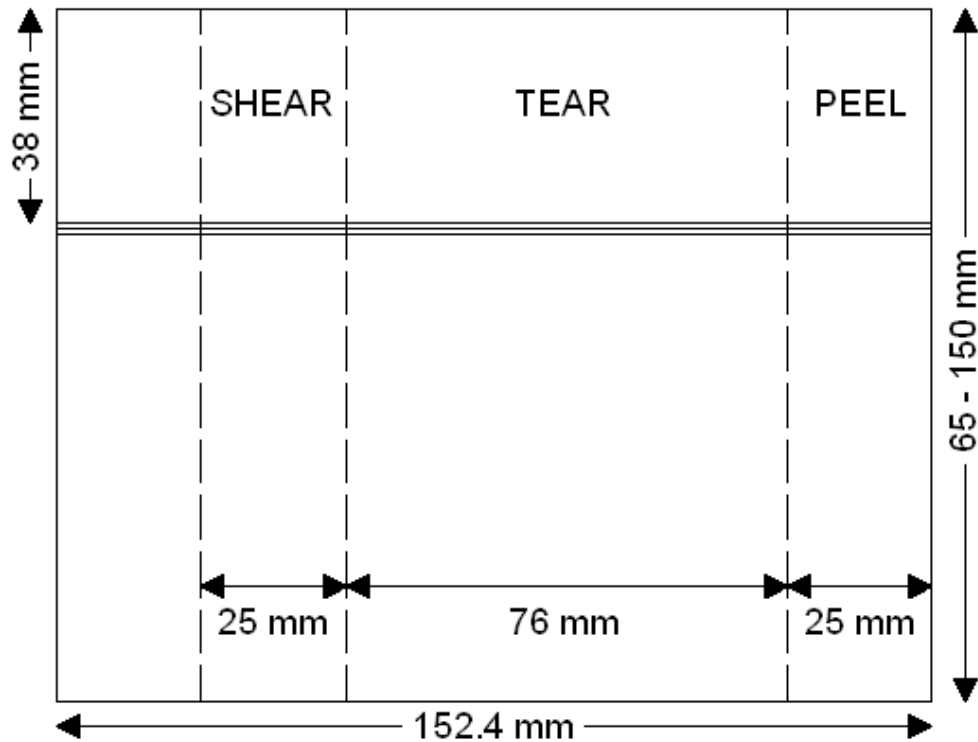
Schematic of individual test specimen locations for weld specimen
